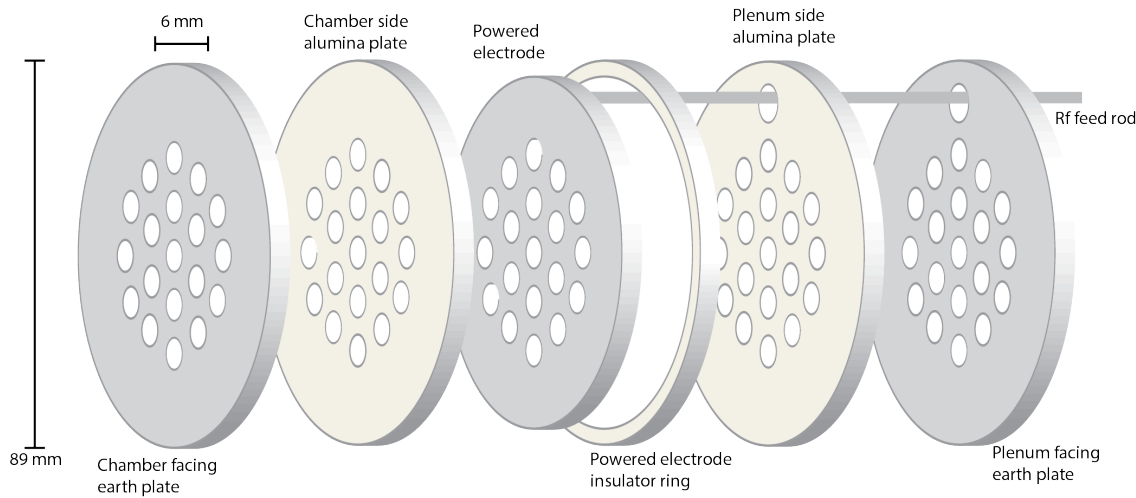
Exploded view of the Distributed Array Shower Head (DASH) source. From left to right the plates are: aluminium ground, alumina insulator, aluminium powered electrode, alumina insulator, aluminium ground. Each plate is 6 mm thick and has a diameter of 89 mm, excepting the powered electrode. The powered electrode has a diameter of 80 mm and is surrounded by an alumina guard ring.
